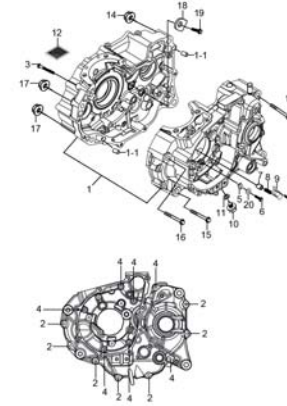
CRANKCASE COVER (P12-S040-0008)
